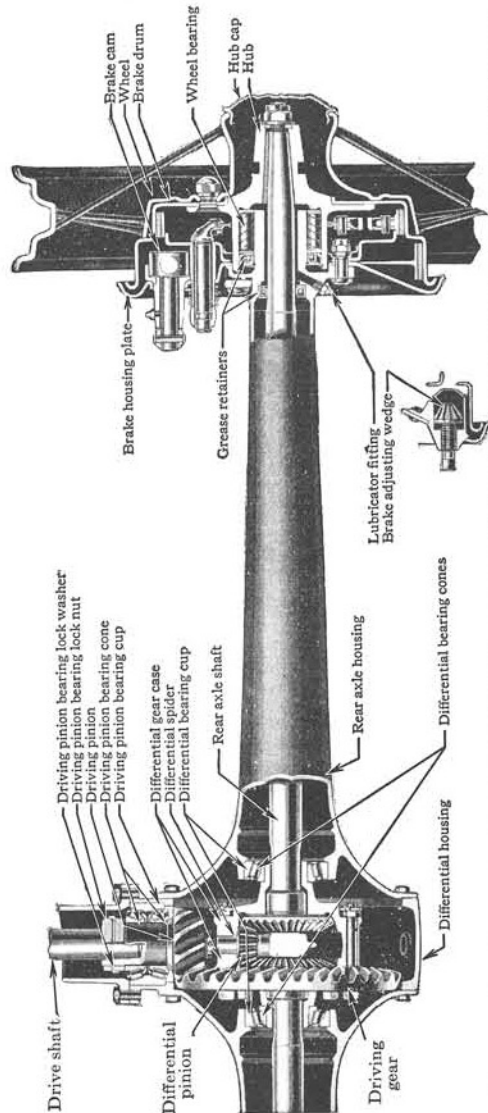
Rear axle assembly showing the drive shaft, driving pinion, driving gear (ring gear), rear axle housing, grease retainers, rear wheel bearings, wheel hub and cap, two-in-one brake drum, brake operating cam, wheel spokes and rim.
